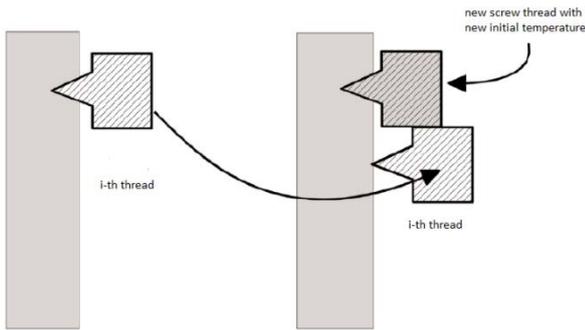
Modelling of screw thread making by separate segments of screw shank
